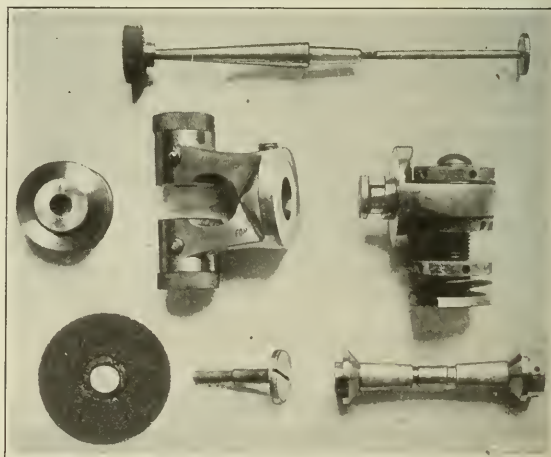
Parts of Hardy Bench Lathe Grinding Attachment
